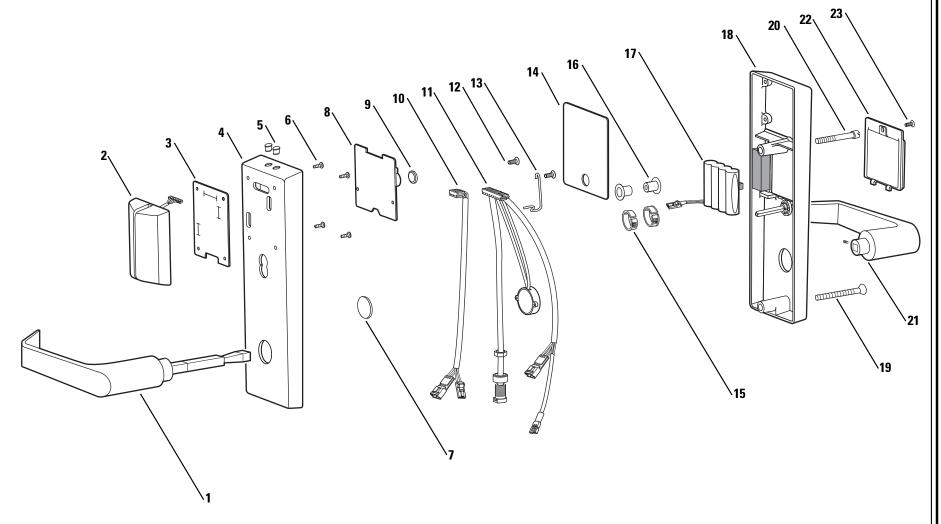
B.A.S.I.S. magnetic stripe reader and trim exploded diagram (mortise shown)
